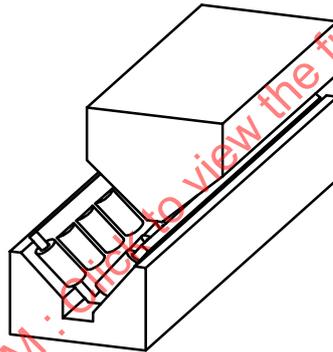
Non-recirculating linear roller bearing, linear guideway, V-angle type
